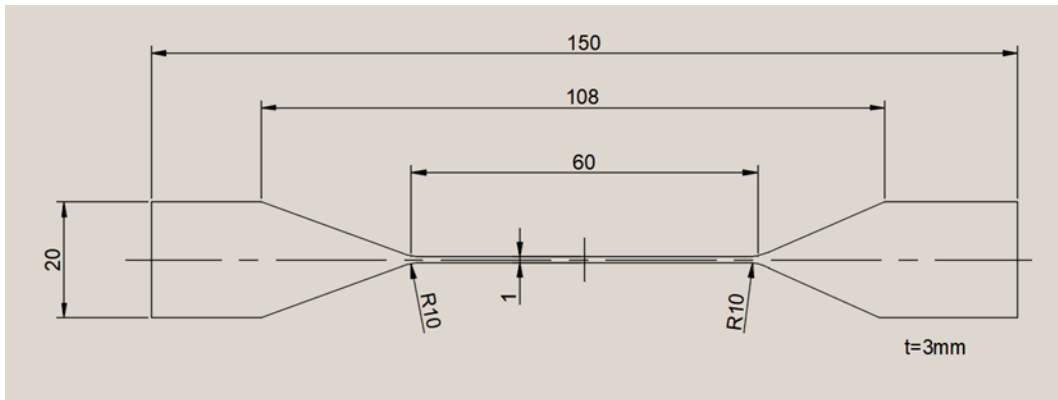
Dimension of dumbbell-shaped test piece made of PET.
